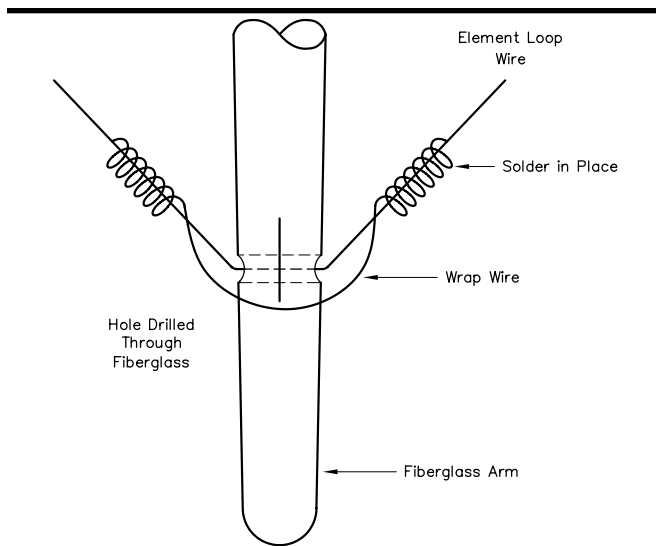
A method of assembling a corner of the wire loop of a quad element to the spreader arm.
